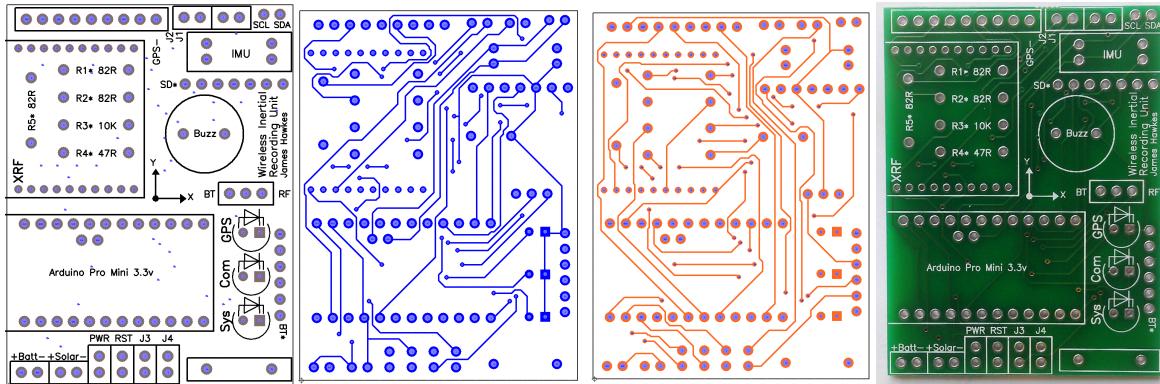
The PCB design, showing the silk screen, top-side routing, bottom-side routing and completed PCB.
